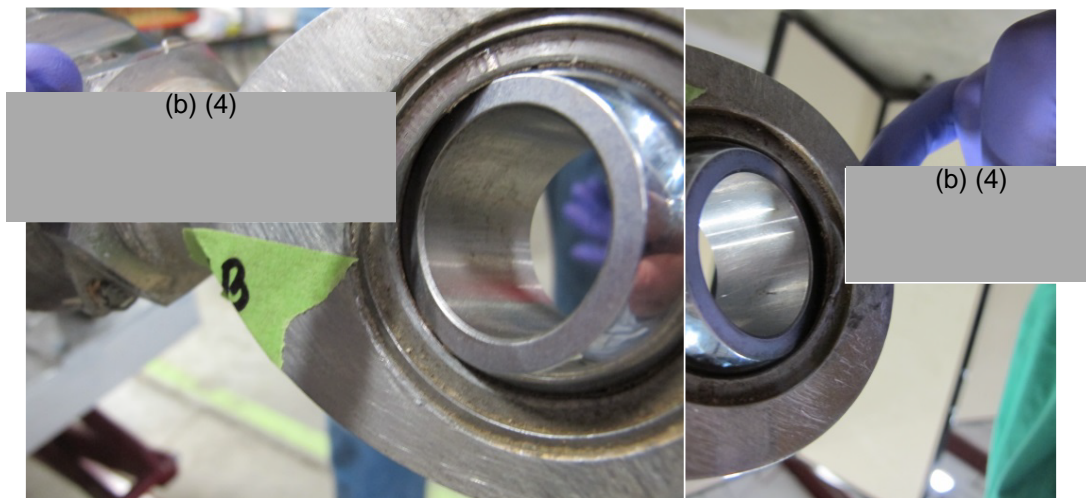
Impact marks on the outer race of the LH actuator rod end bearing
